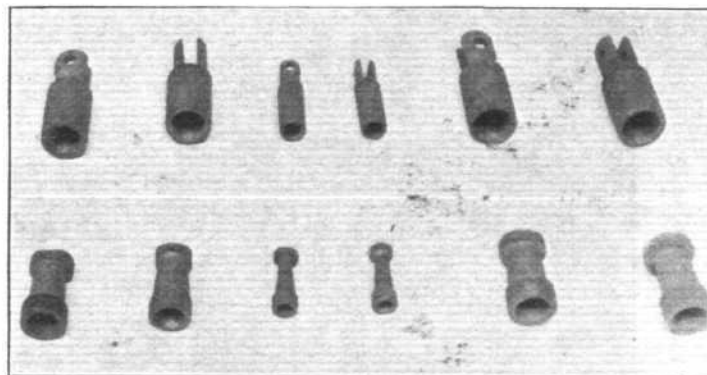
Conical cable ends are used, the cable strands being splayed out and soldered with "Cazin."
